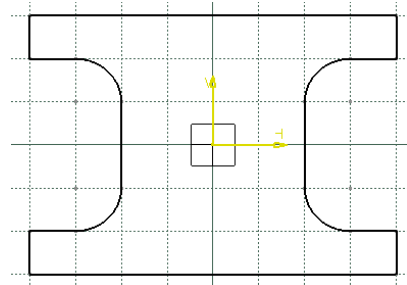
The sketch after drawing the outer loop and hiding the constraints
